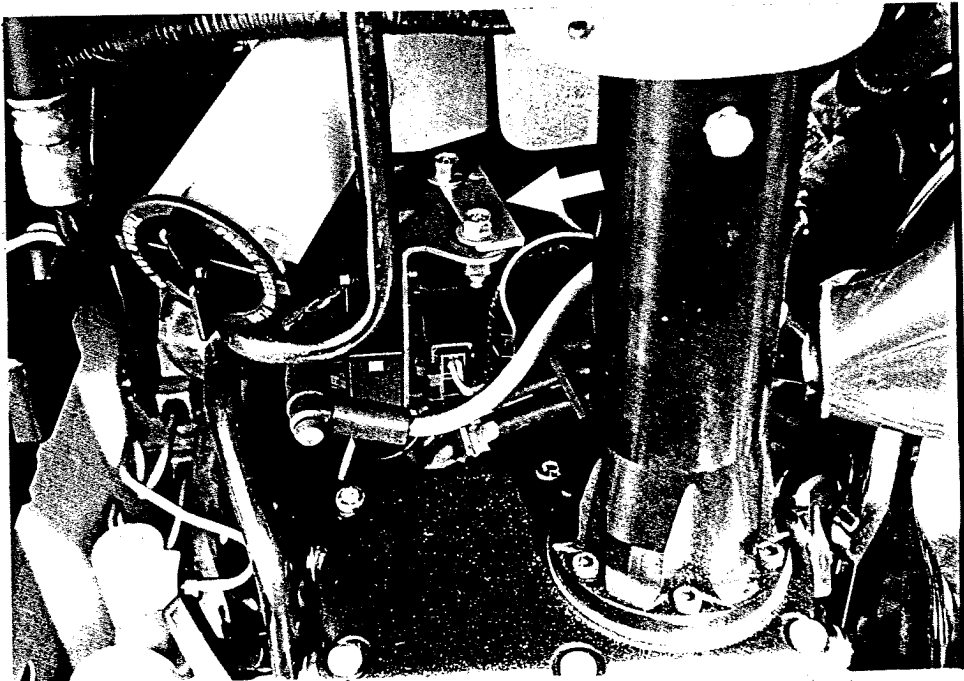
G140 THROTTLE BODY ADAPTOR
